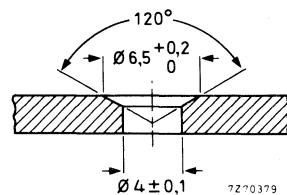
Shape of hole for 500 V insulation, nut fastening.
